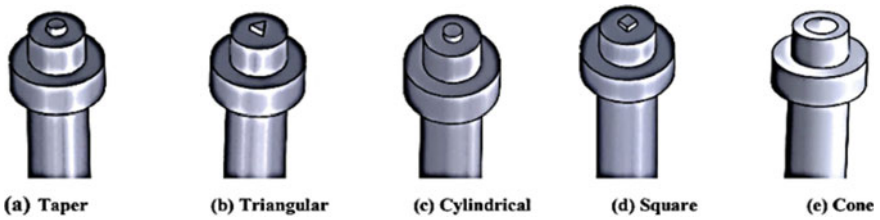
Tools pin shapes utilized for the weld preparation [32]
